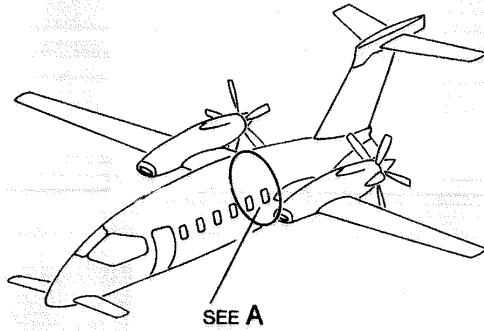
Pressurization Emergency Check Valves - Inspection
